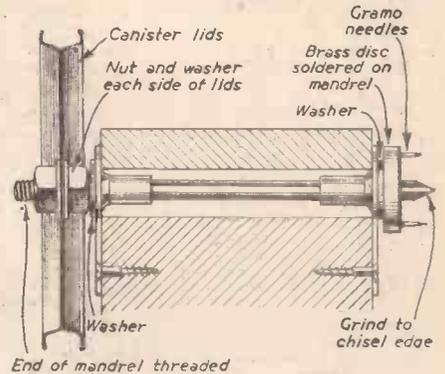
A sectional view of the headstock showing mandrel and chuck details.
